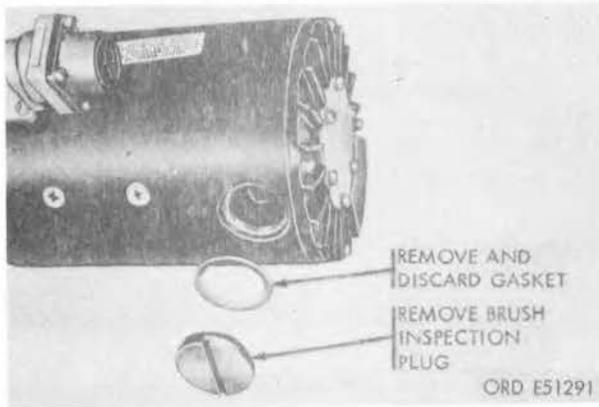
REMOVING BRUSH INSPECTION PLUG AND GASKET.
